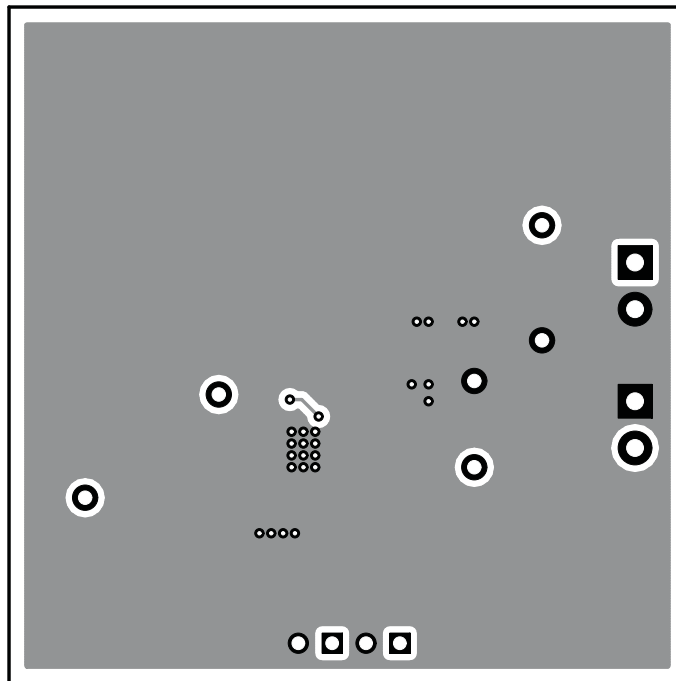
TPS54332EVM-416 Bottom-Side Layout
